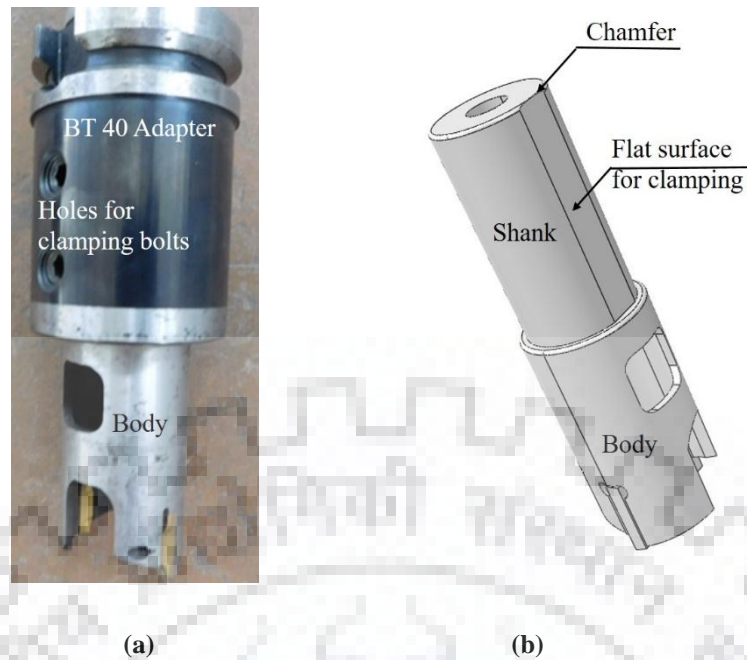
Trepanning tool (a) with BT 40 adapter (b) CAD model of tool
